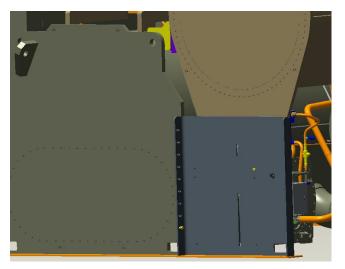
, p. 31). Then remove the bolts from the flanges connecting the shells.
